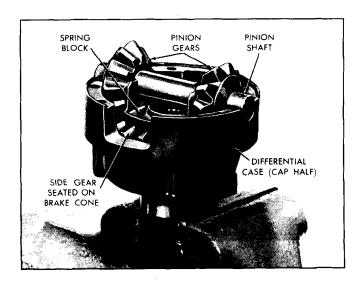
B-12 Installing Parts in Cap Half - Two Pinion
